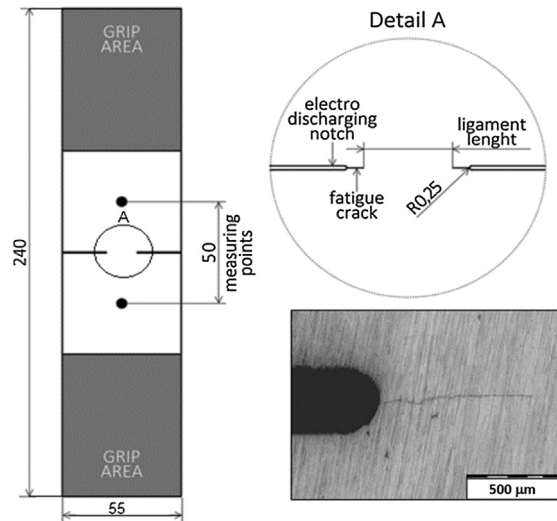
DENT specimen geometry and detail of fatigue crack at the notch root.
